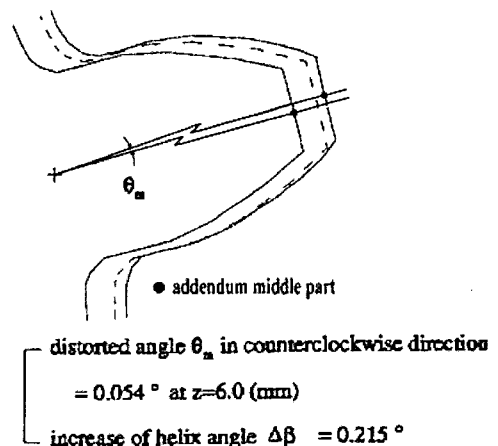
Distortion of tooth form at the upper section of a helical gear
